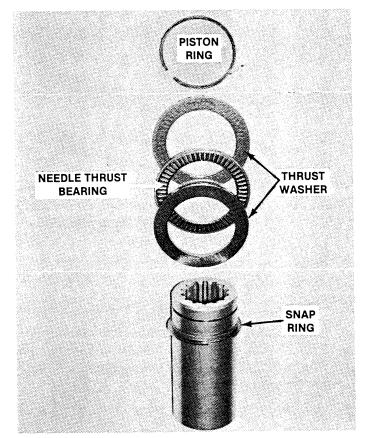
Pump Drive Coupling Partially Disassembled.
